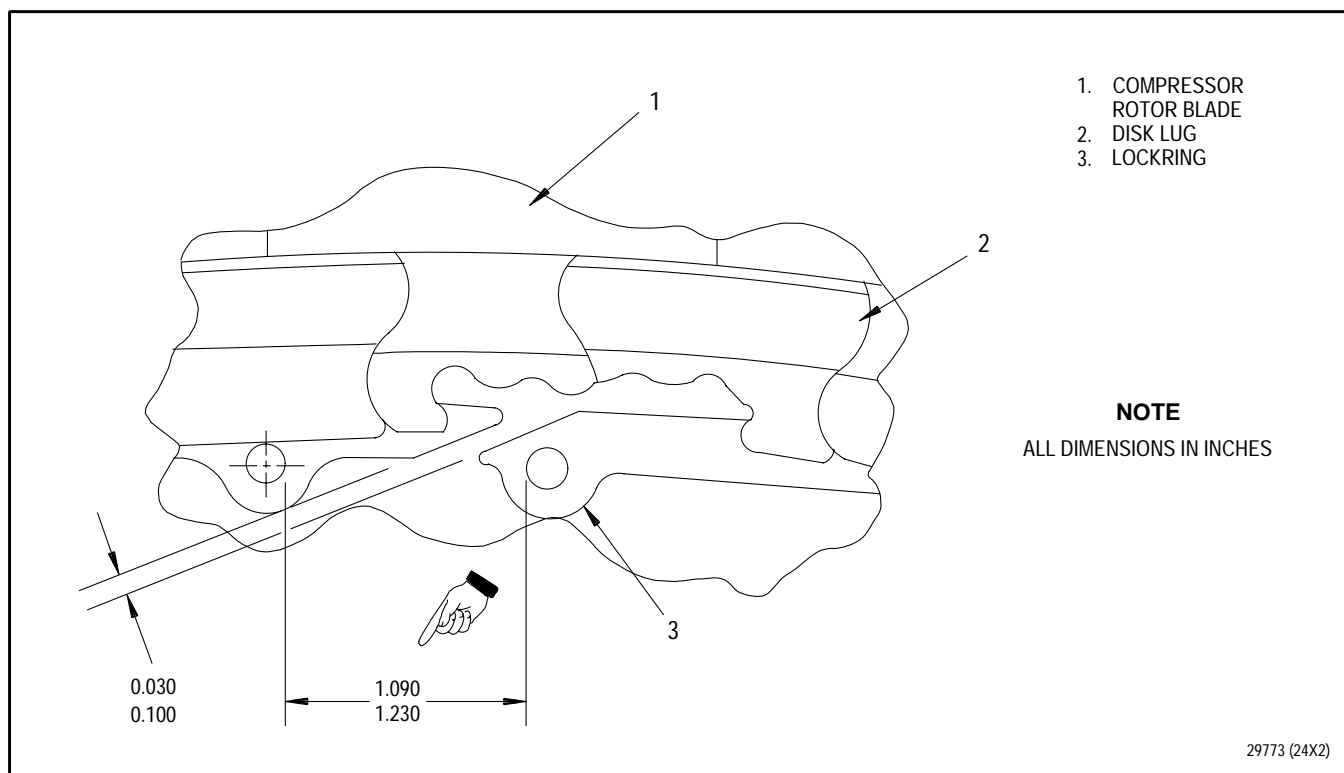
Fourth and Fifth Stage Blades - Lockring Measurement (Typical)
